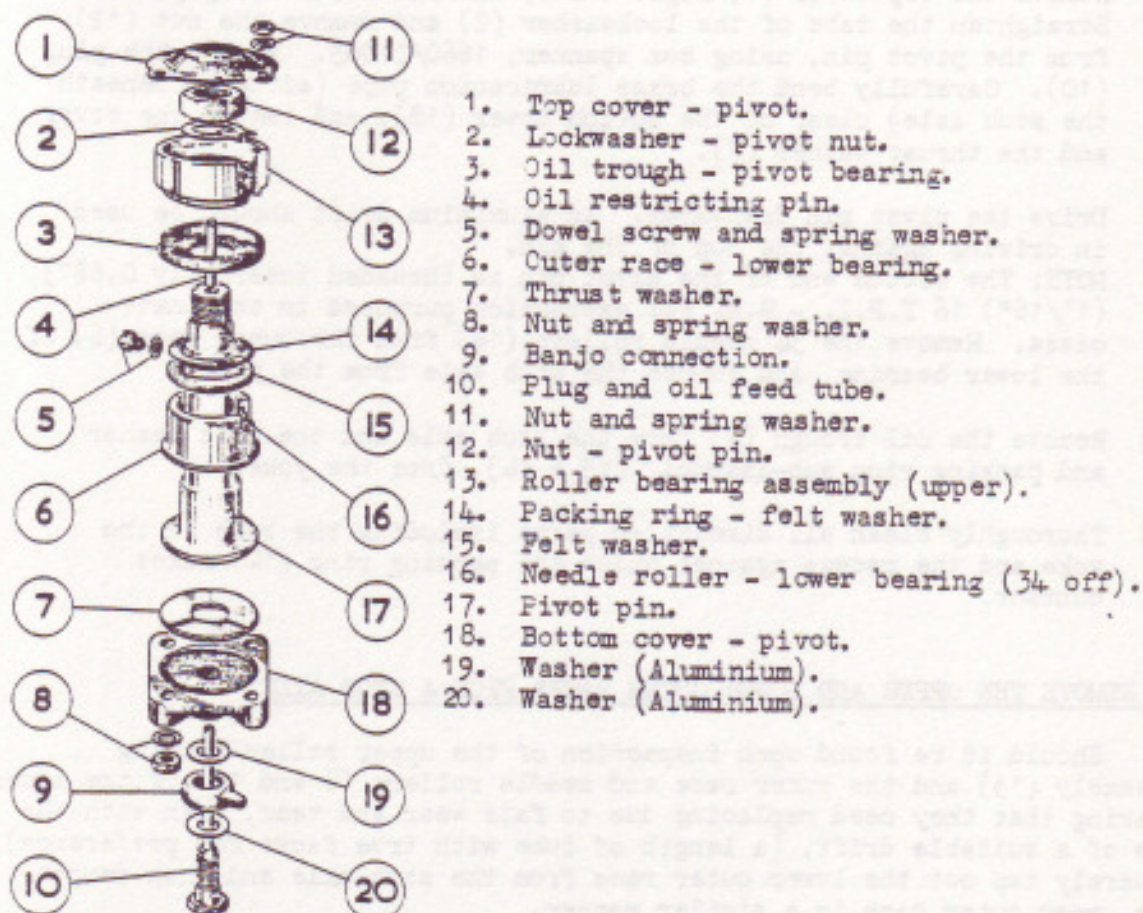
EXPLODED VIEW - PIVOT AXLE (PIVOT PIN & BEARINGS).
